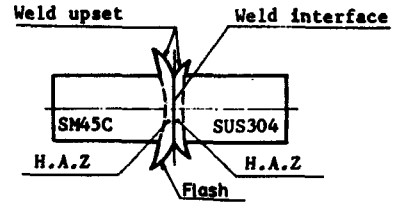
Cross section through a friction weld joining the SM45C and SUS304
